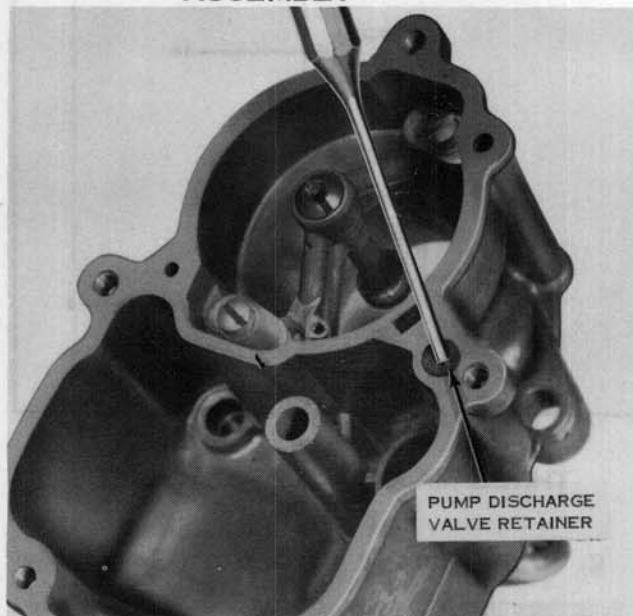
REMOVE PUMP DISCHARGE VALVE RETAINER
